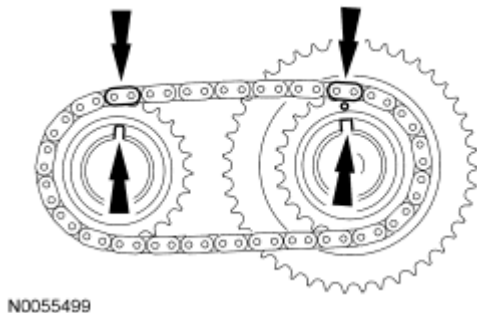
Aligning LH Exhaust Camshaft Sprocket & LH Secondary Timing Chain Colored Links With Timing Marks
